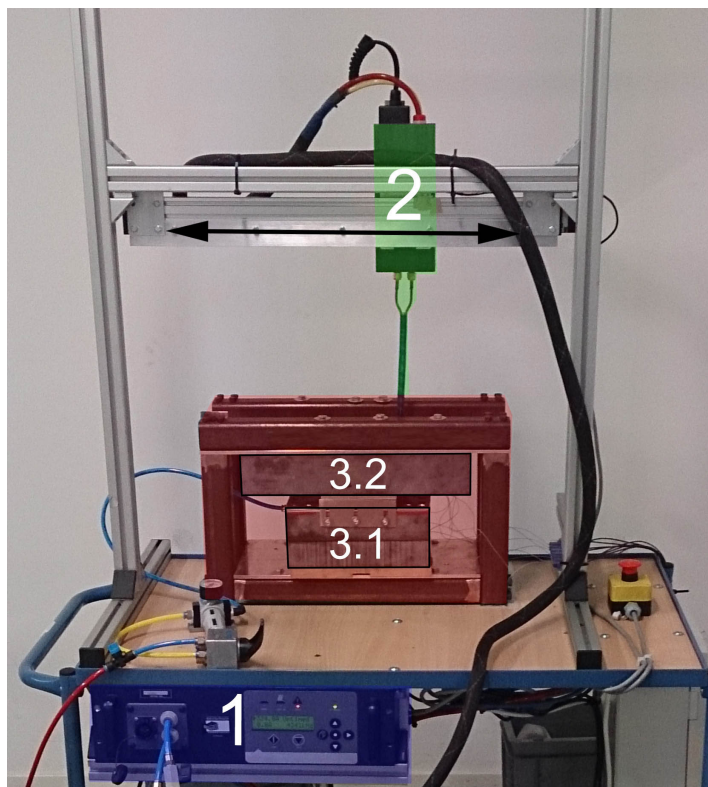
Welding station with the generator (1), the welding head on a linear guide (2), Bottom of the pressure frame with silicon balloon (3.1), and the top of the pressure frame (3.2)
